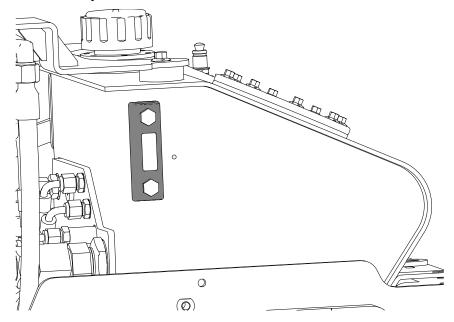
Liquid Level Indicator of Hydraulic Oil Tank
